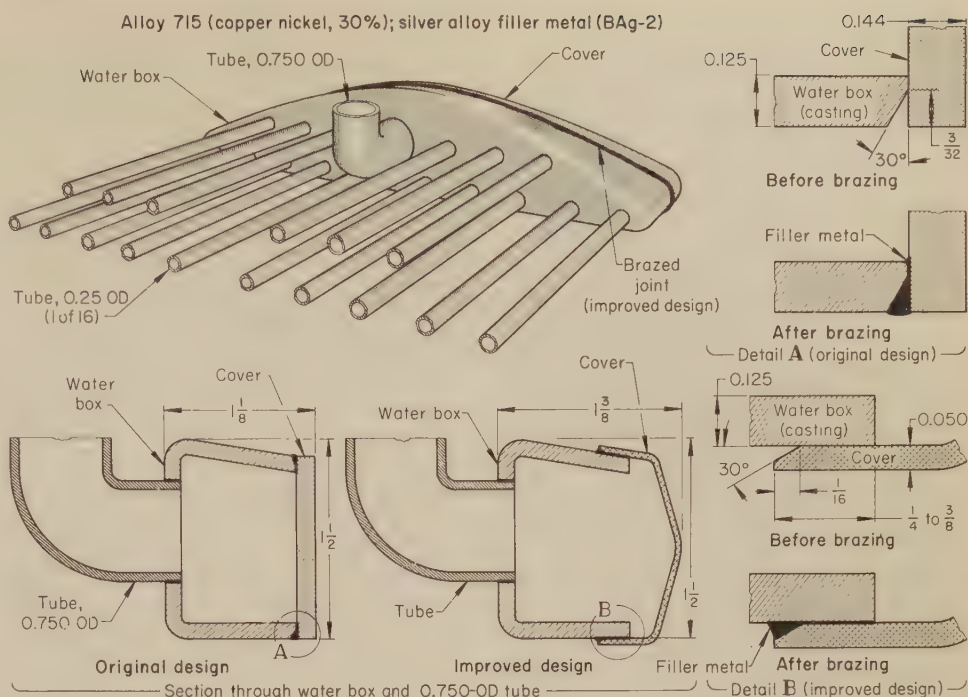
Change in joint design that eliminated leakage in a torch brazed component of a cooler for an electronic system (Example 647)
